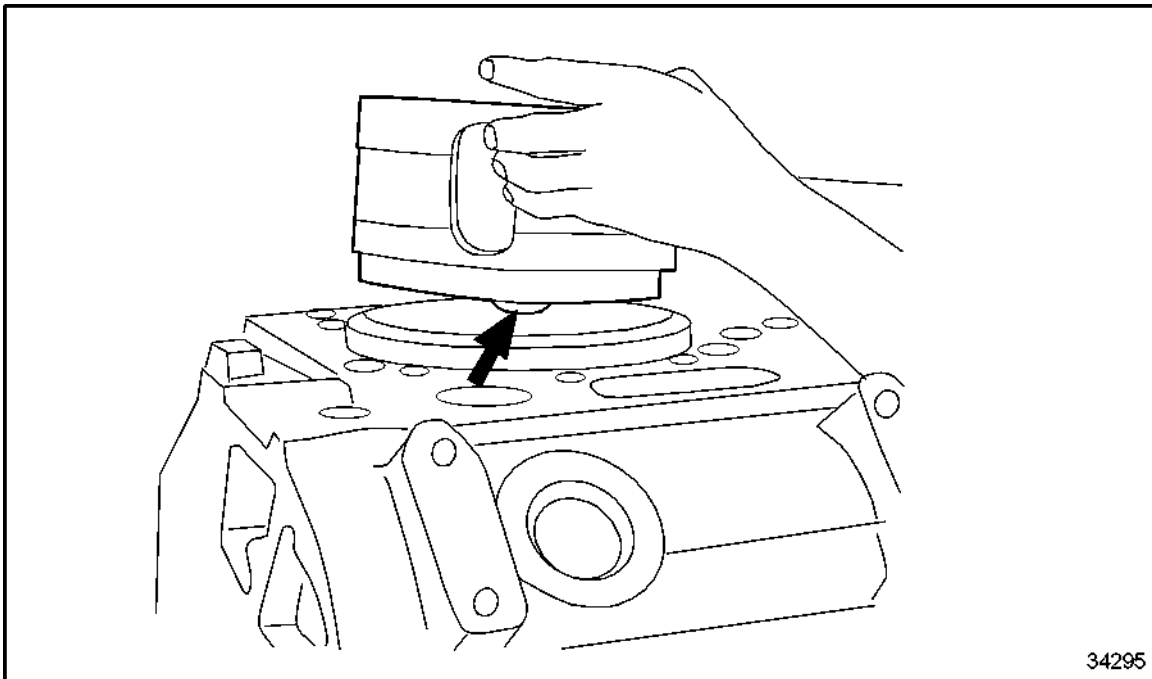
Cylinder Liner With Carbon Scraper Ring (Marine Only)
